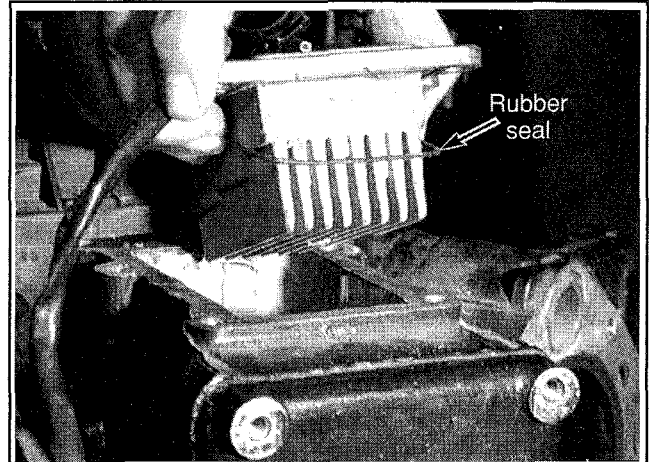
then unbolt and remove the regulator/rectifier from the powerhead (noting the gasket or rubber seal)
